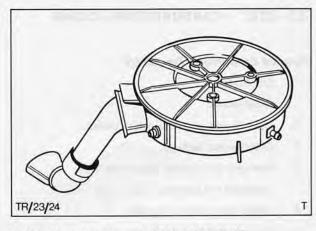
Air cleaner assembly 1.6 litre Kent (OHV)
